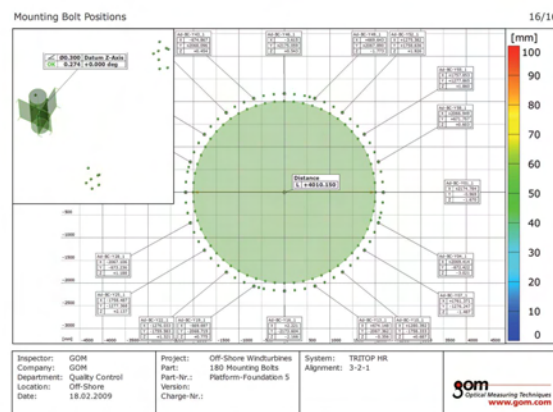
Measuring report from TRITOP^{CMM} software with position of mounting bolts and detail of Geometric Dimensioning and Tolerancing (GD&T)
